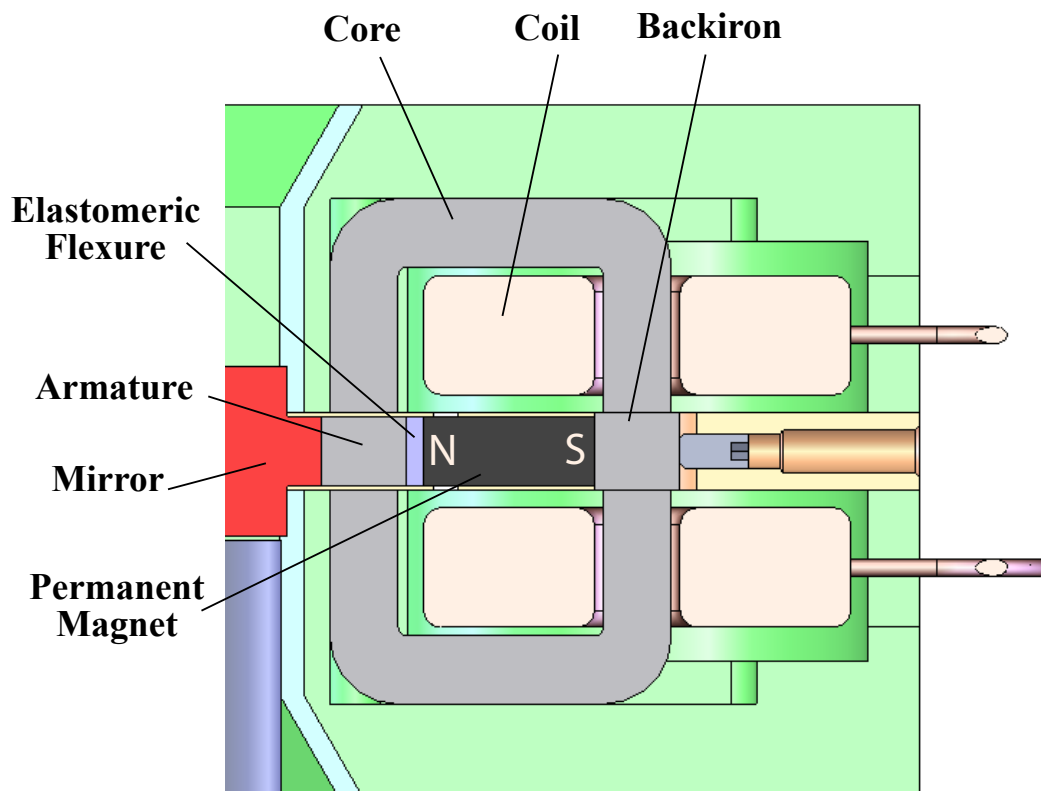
Cross-sectional view of the magnetic actuator showing component detail.
